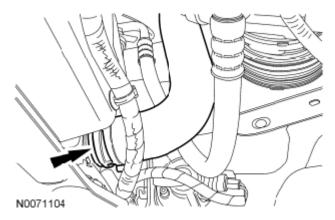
Locating Lower Radiator Hose Courtesy of FORD MOTOR CO.
